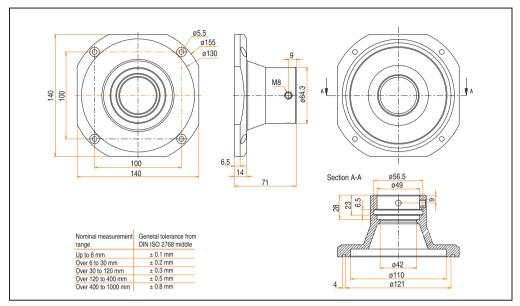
Dimensions - extension flange 5AC800.FLG1-00
